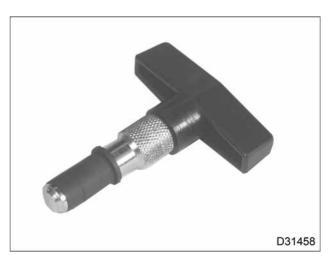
Crankcase-to-head Removal Tool ZTSE4694
